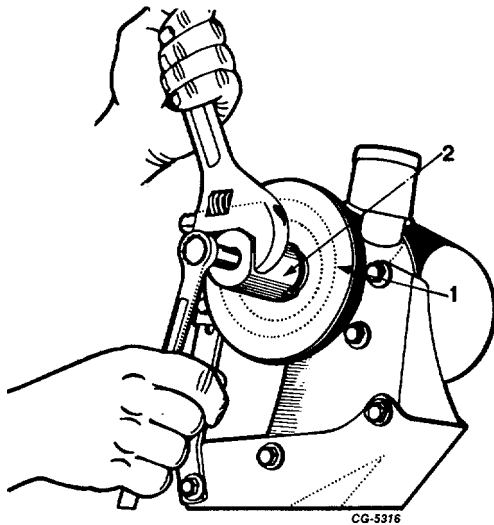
Using SE-2420 Puller to Remove Power Steering Pump Pulley
